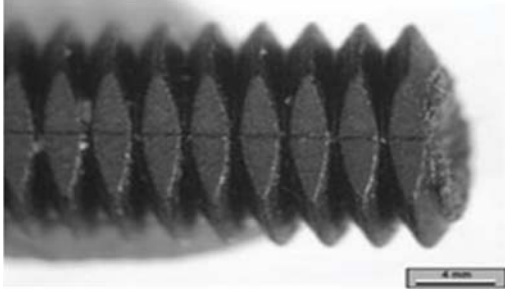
Fracture of a glass-filled polyamide Cross section showing fracture along the threaded part due to stress concentration at the thread root. [1]
